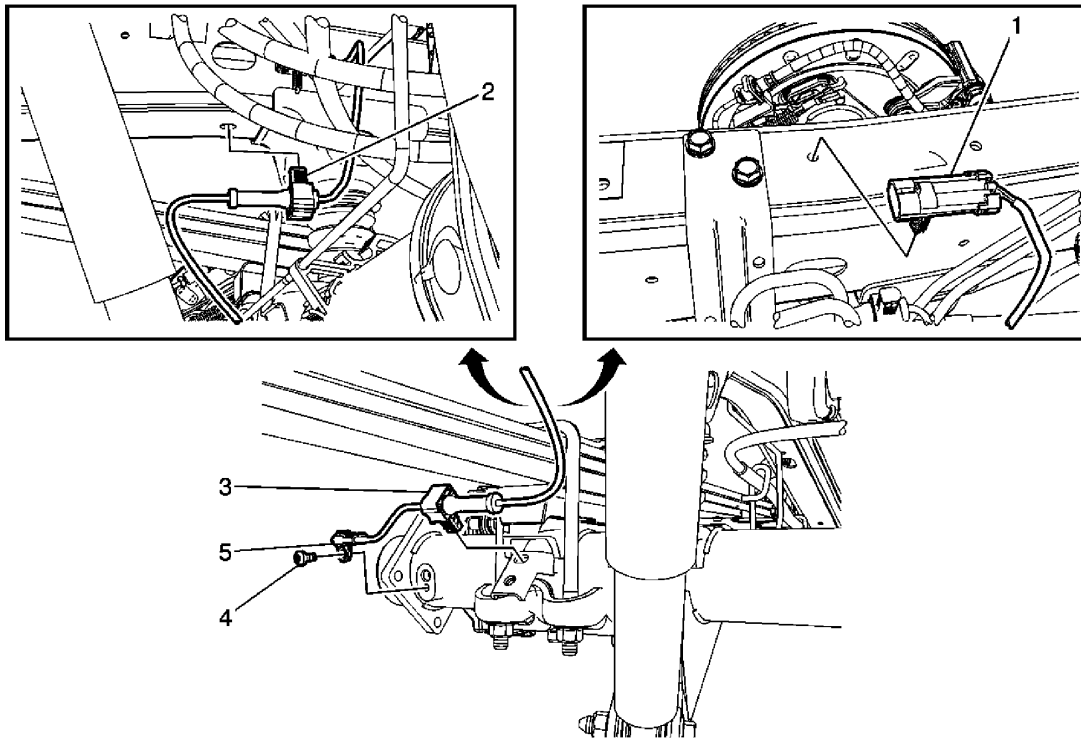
View Of Rear Wheel Speed Sensor & Components
